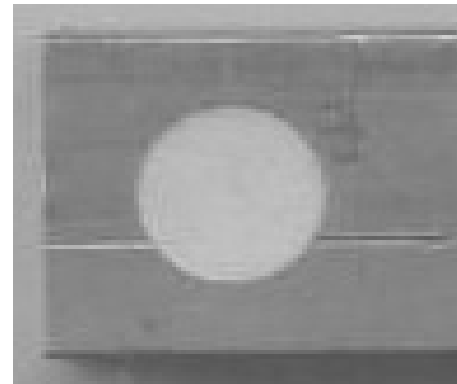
Surface of CuZn40(C-2800B) specimen machined using optimal EDM parameter settings (A1B3C1D2)
